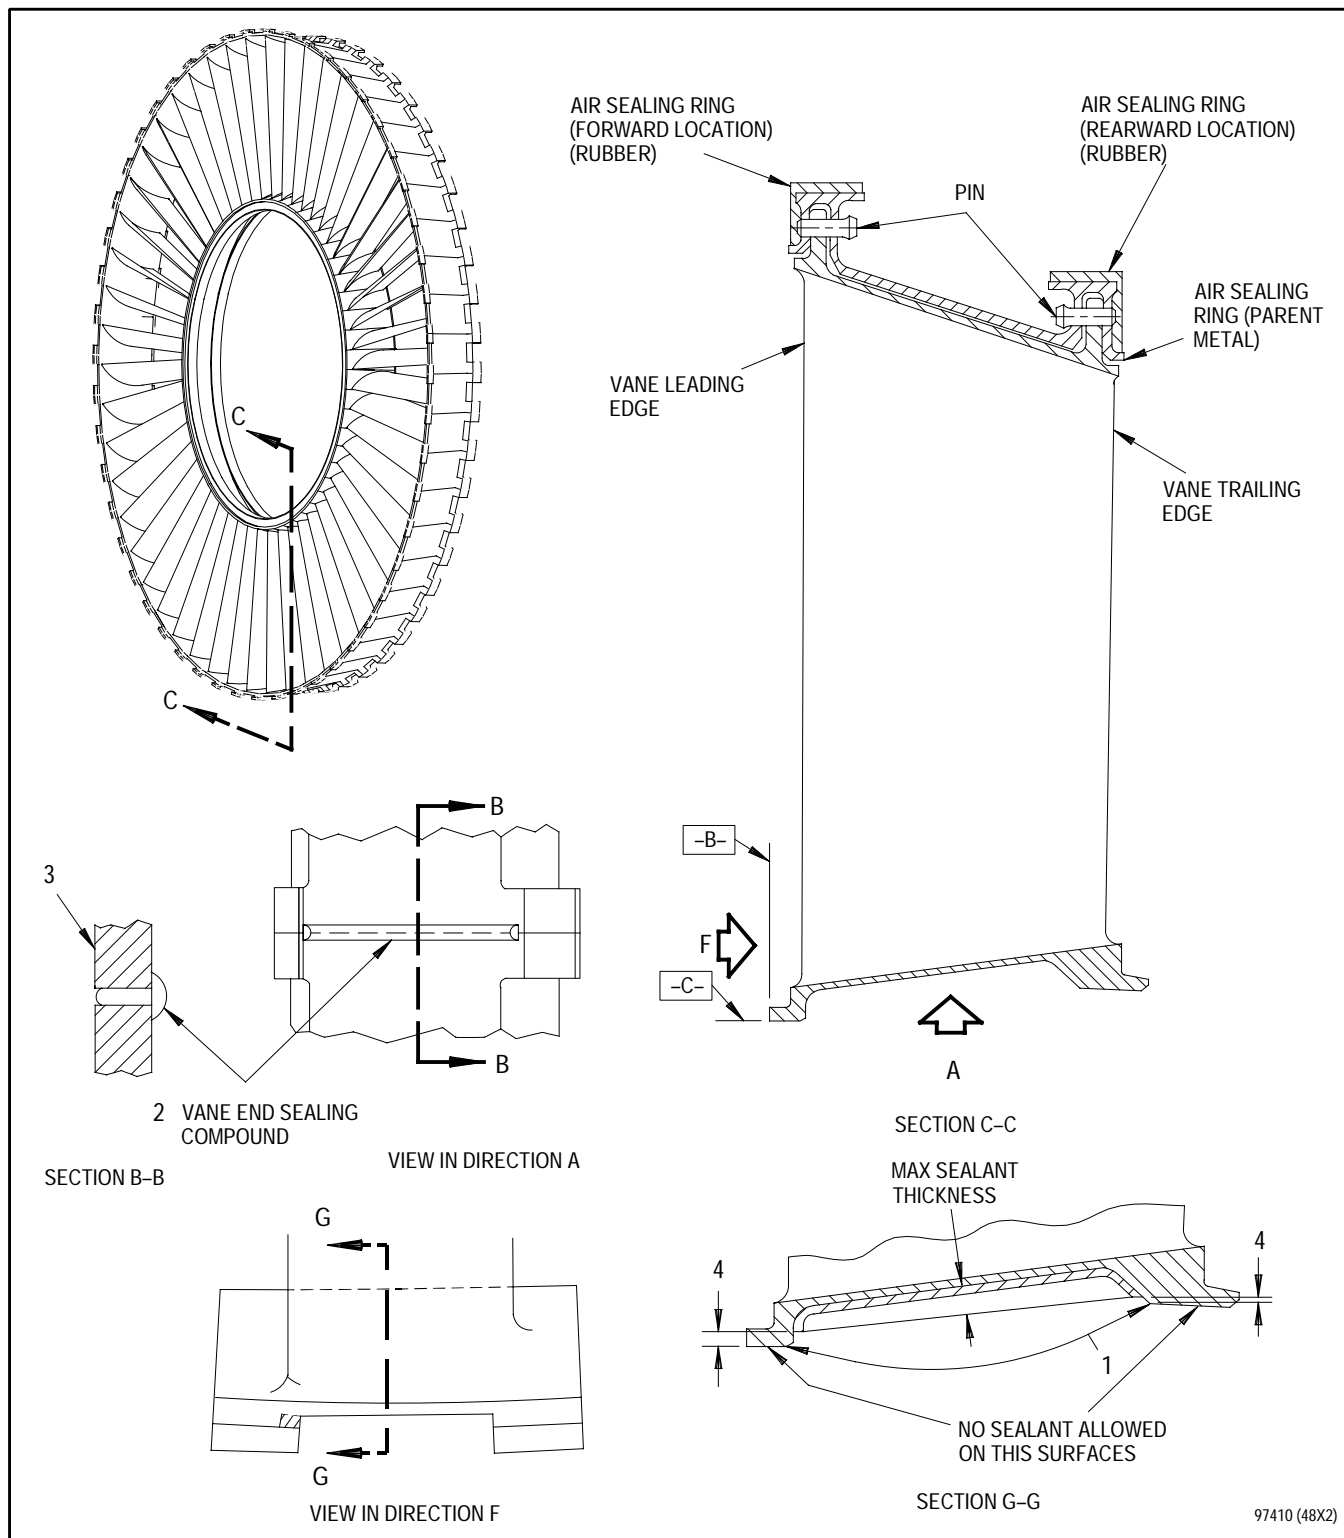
First Stage Compressor Stator Assembly - Outer Slot Rubber Replacement
